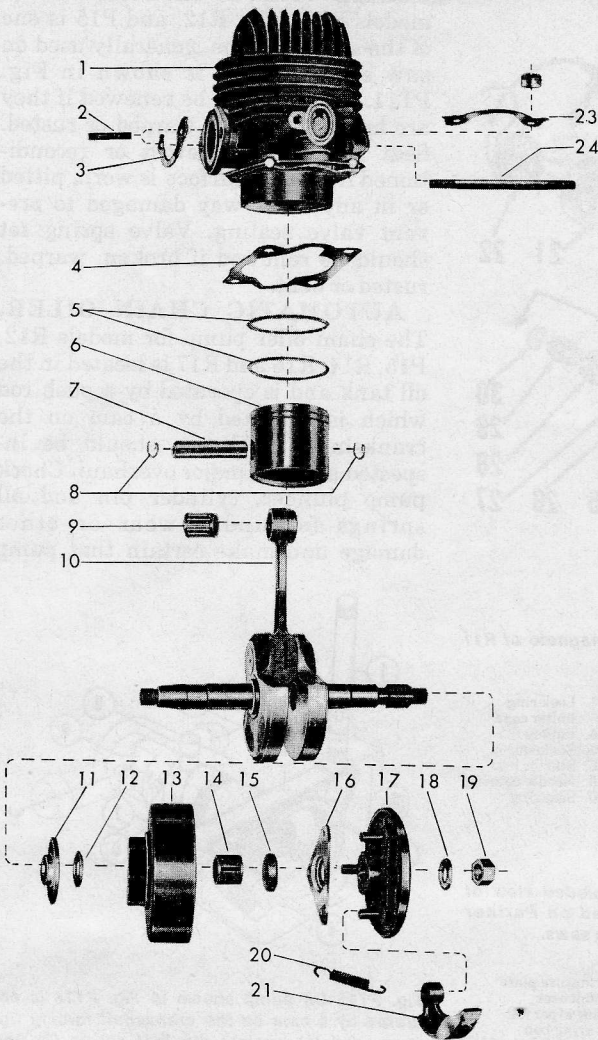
Exploded view showing cylinder, piston, crankshaft and rod and clutch assembly of the model TS engine.
